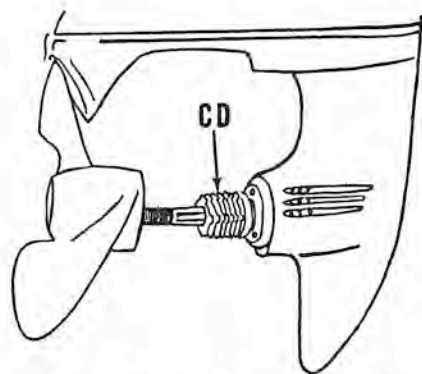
Lower unit gearcase with propeller removed showing the multiple disc drive clutch. Refer to text for details.
